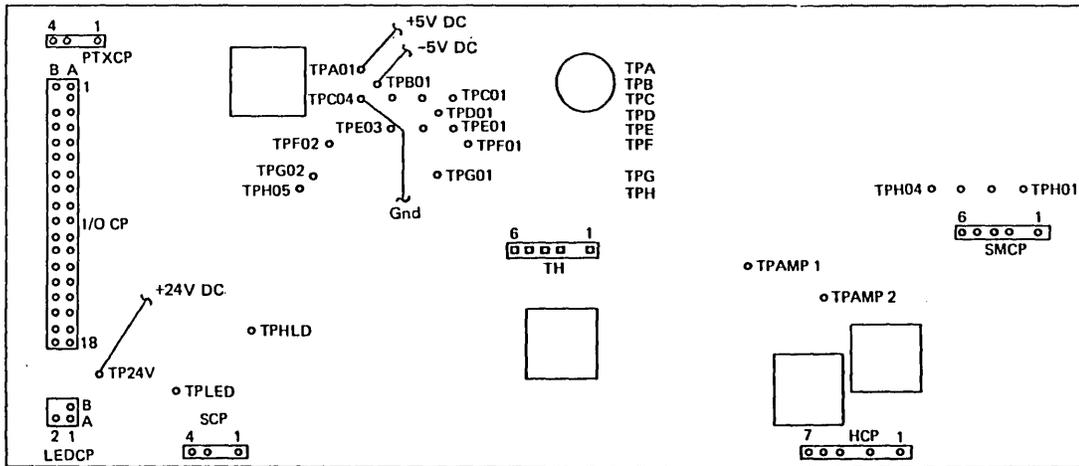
(Part 3 of 4). Diskette Drive Parts
